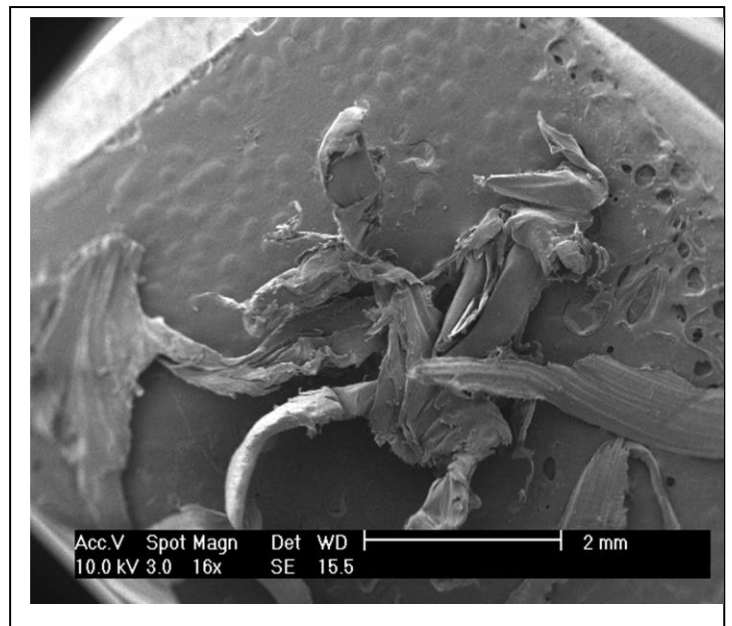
Area of tooth crack for 65°C gear tooth.
